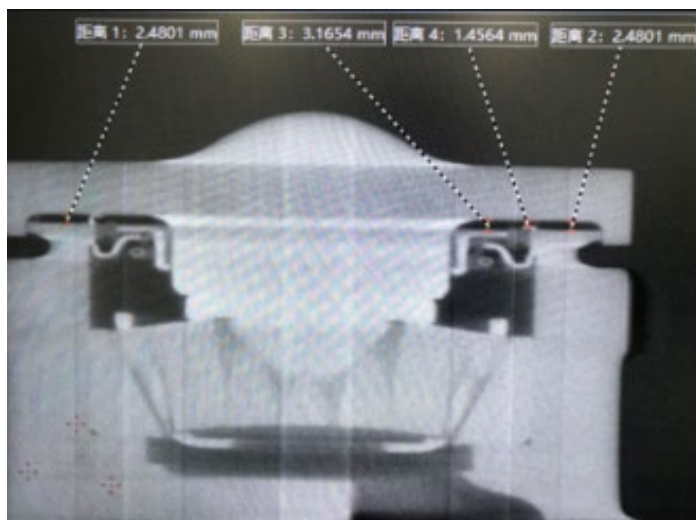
CVT wheel side shaft seal assembly misalignment inspection
